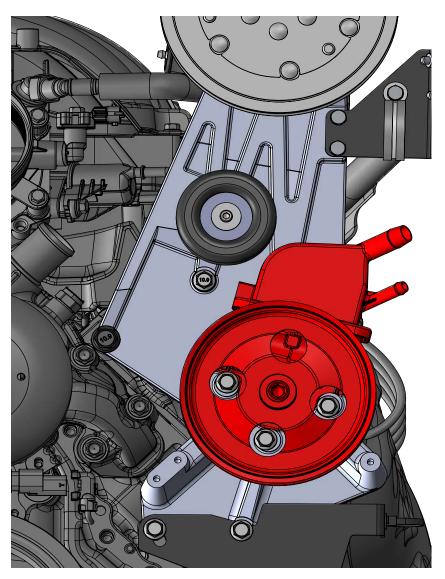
Power Steering Pulley Reinstalled on the Clutch Housing
